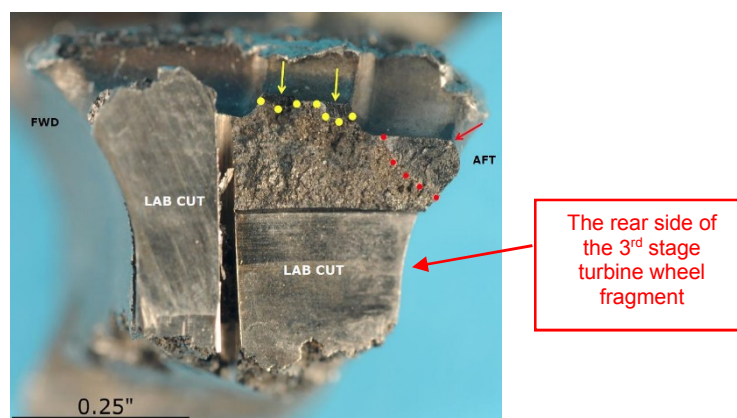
View showing the exposed fracture surface of the crack in the rivet hole of 3rd stage turbine wheel. Fatigue thumbnail patterns emanating from the aft corner of the rivet hole (red arrow) and smallest diameter surface at the base of the rivet hole (yellow arrows). Red and yellow dots outline the extent of fatigue propagation.
